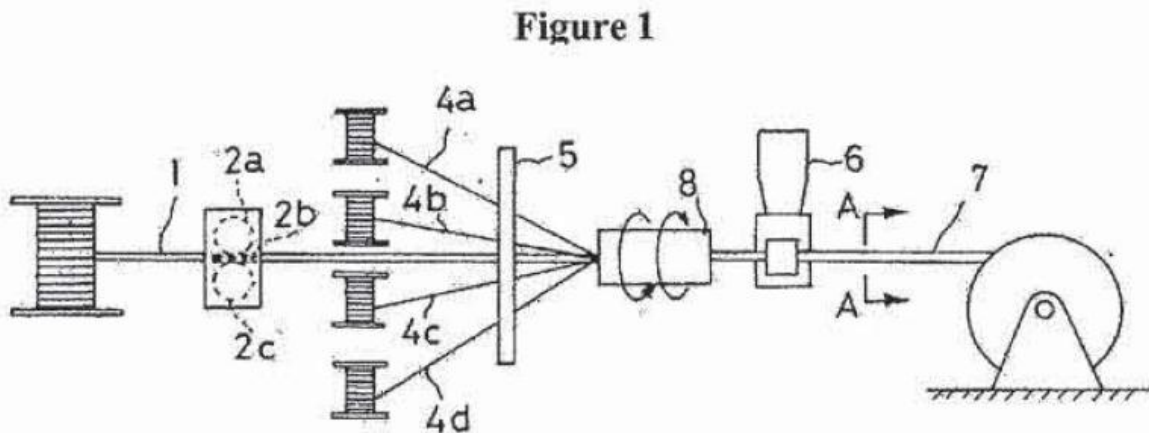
illustrates an assembly for carrying out the method of forming a cable disclosed in JP '910
